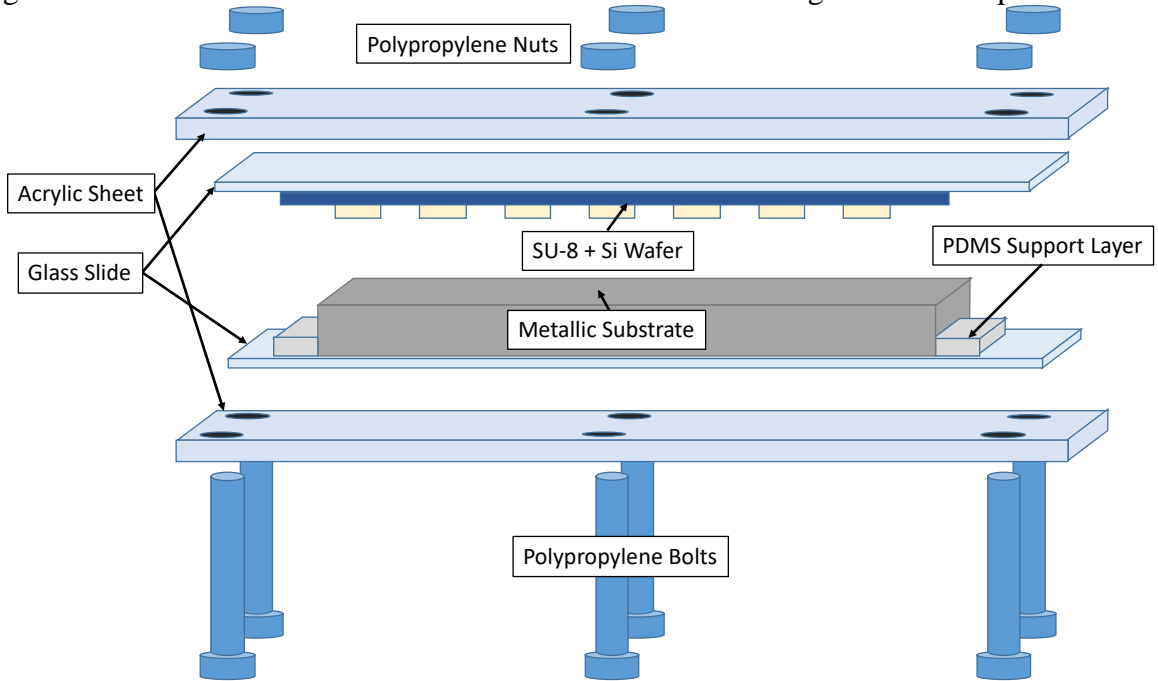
Exploded isotropic view of the mold-substrate assembly
